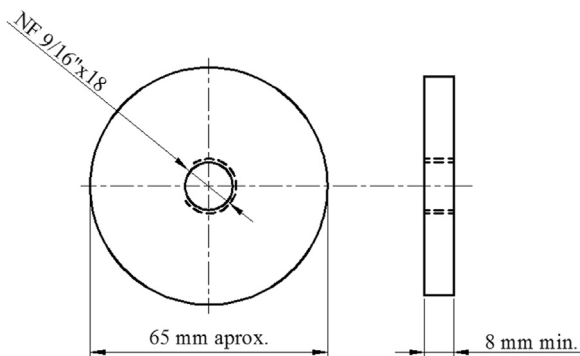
Scheme of the RCF sample geometry and dimensions.
